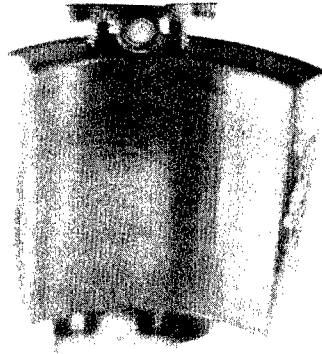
Contact Surfaces on Tilting Pad Bearing
